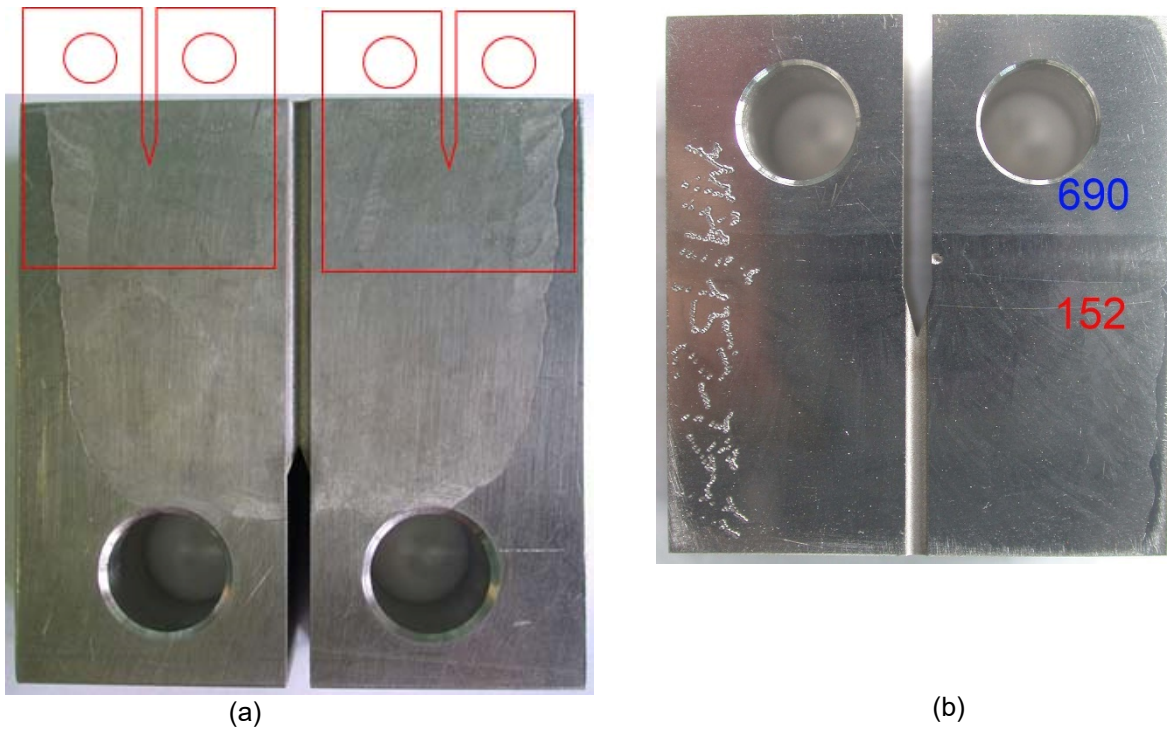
(a) original 1T CT specimen fabricated from the Alloy 152 “Kewaunee” mock-up weld produced by Mitsubishi Heavy Industries, Japan, and (b) additional 1/2T CT specimens obtained after the initial test was completed.
